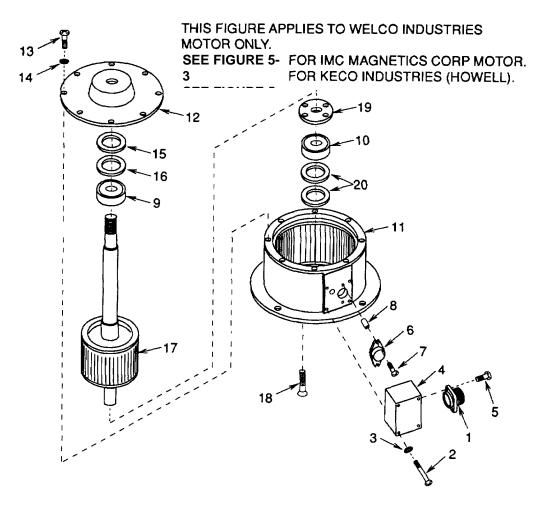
Evaporator and Condenser Fan Motor (Welco Industries Motor).
